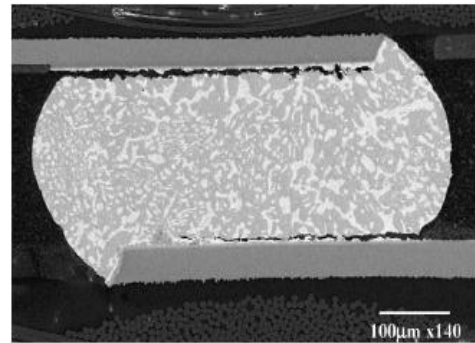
Crack Propagation at the Top and Bottom of a Solder Joint, 15mm BGA [3].
